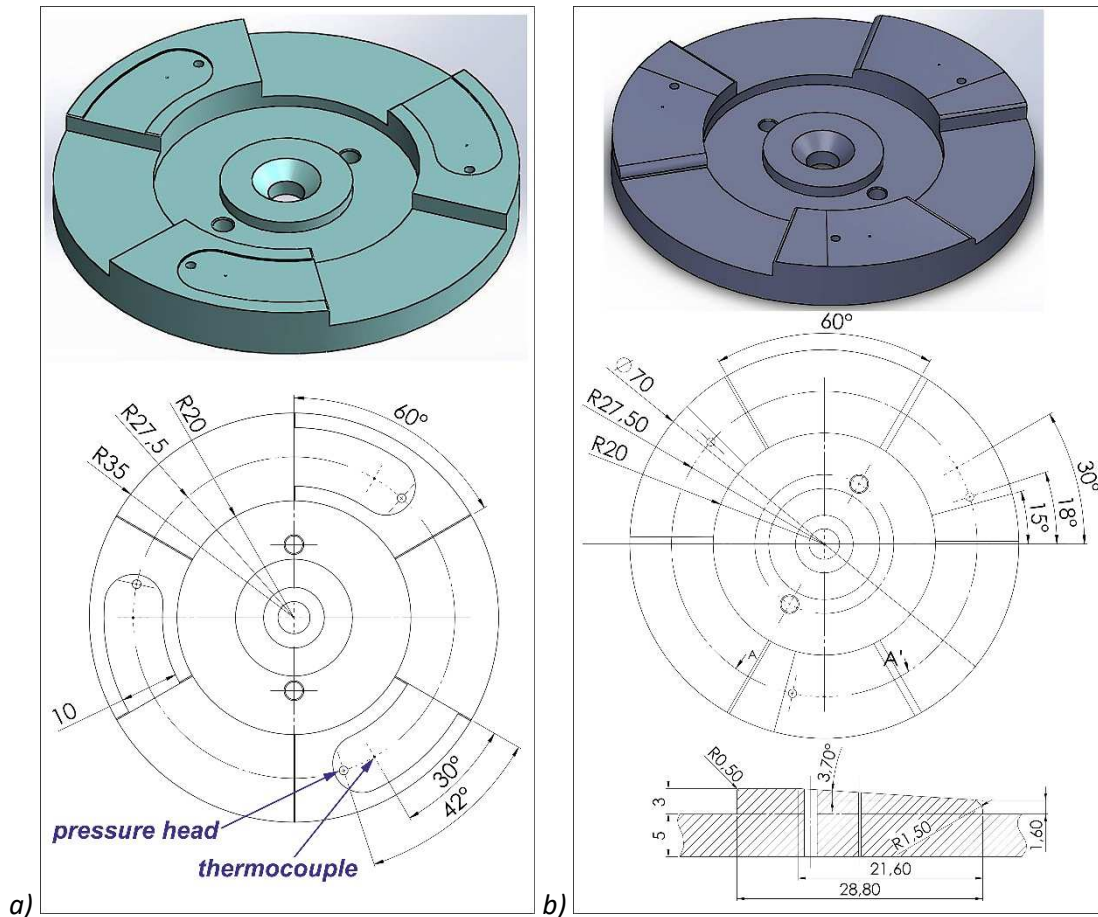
CAD models of dislocators: a) pocketed dislocator; b) tapered land dislocator
